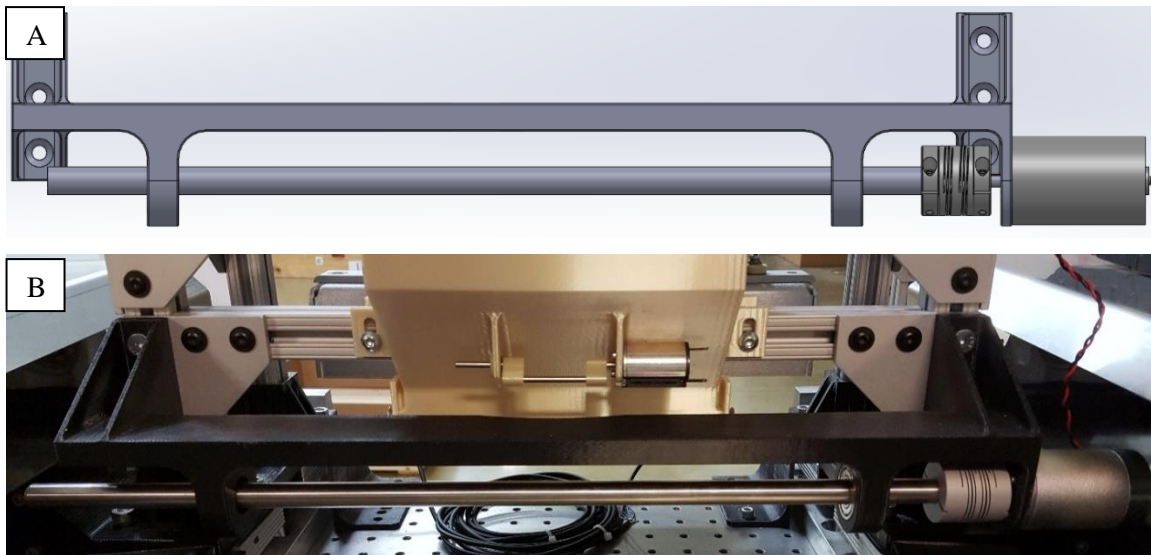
The counter-rotating roller assembly CAD model (A) and actual parts (B) used for spreading powders.
